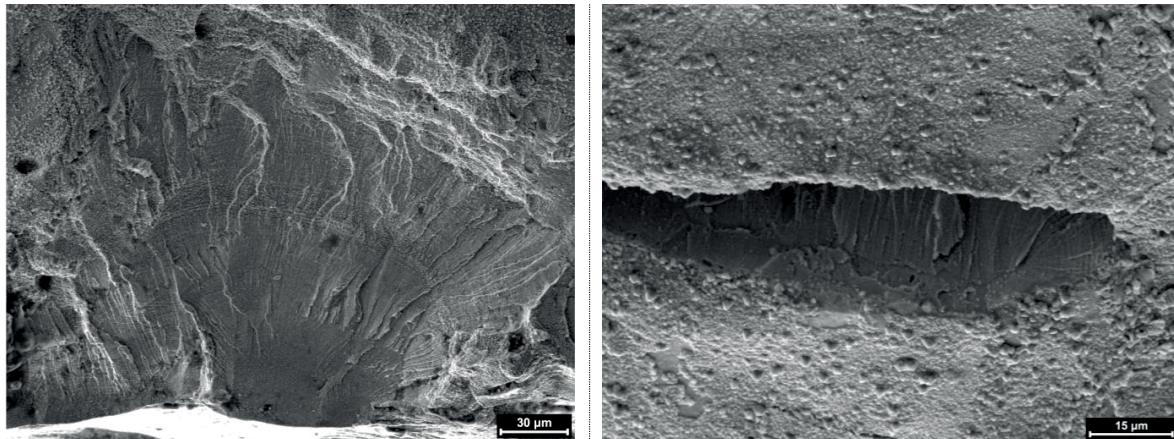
Typical TG-C crack formed in the fracture surface (left) and on the sample surface (right).
